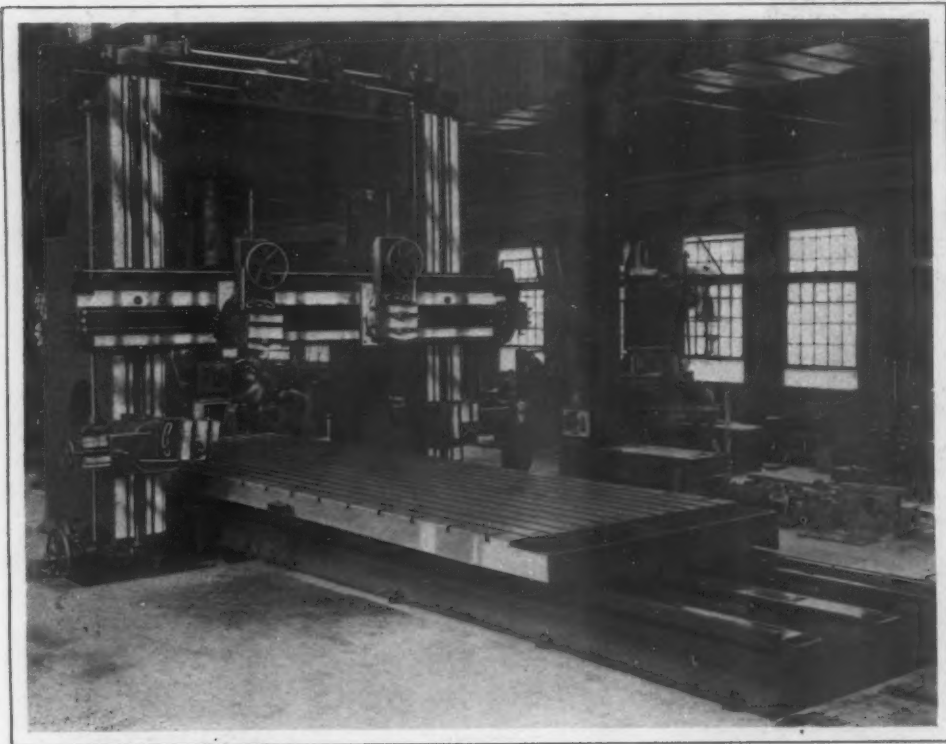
A Large German Planing Machine Imported and Sold to the Mesta Machine Company by the Wiener Machinery Company, New York City
